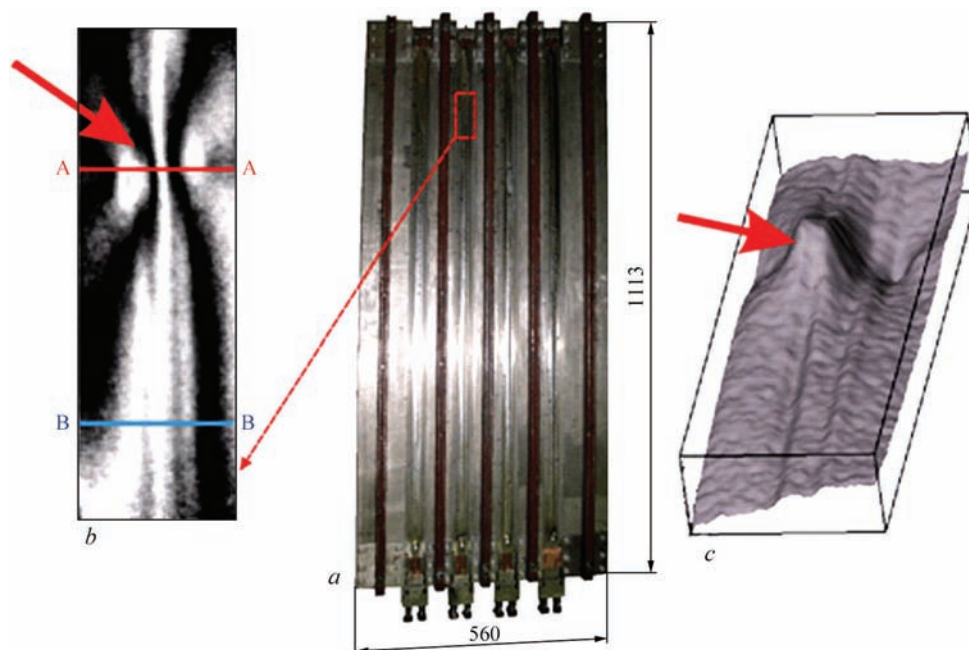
Nondestructive quality testing of stringer panel of alloy VT-20 by electron shearography method: *a* — panel in mechanical fixture after welding; *b* — pattern of interference fringes in the examined region; *c* — three-dimensional pattern of deformed surface
